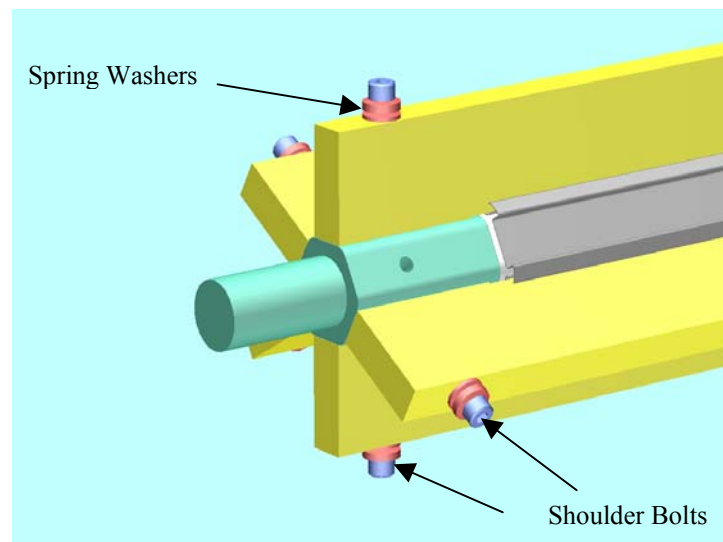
Detail of Run IIb L0 shell assembly fixture.
